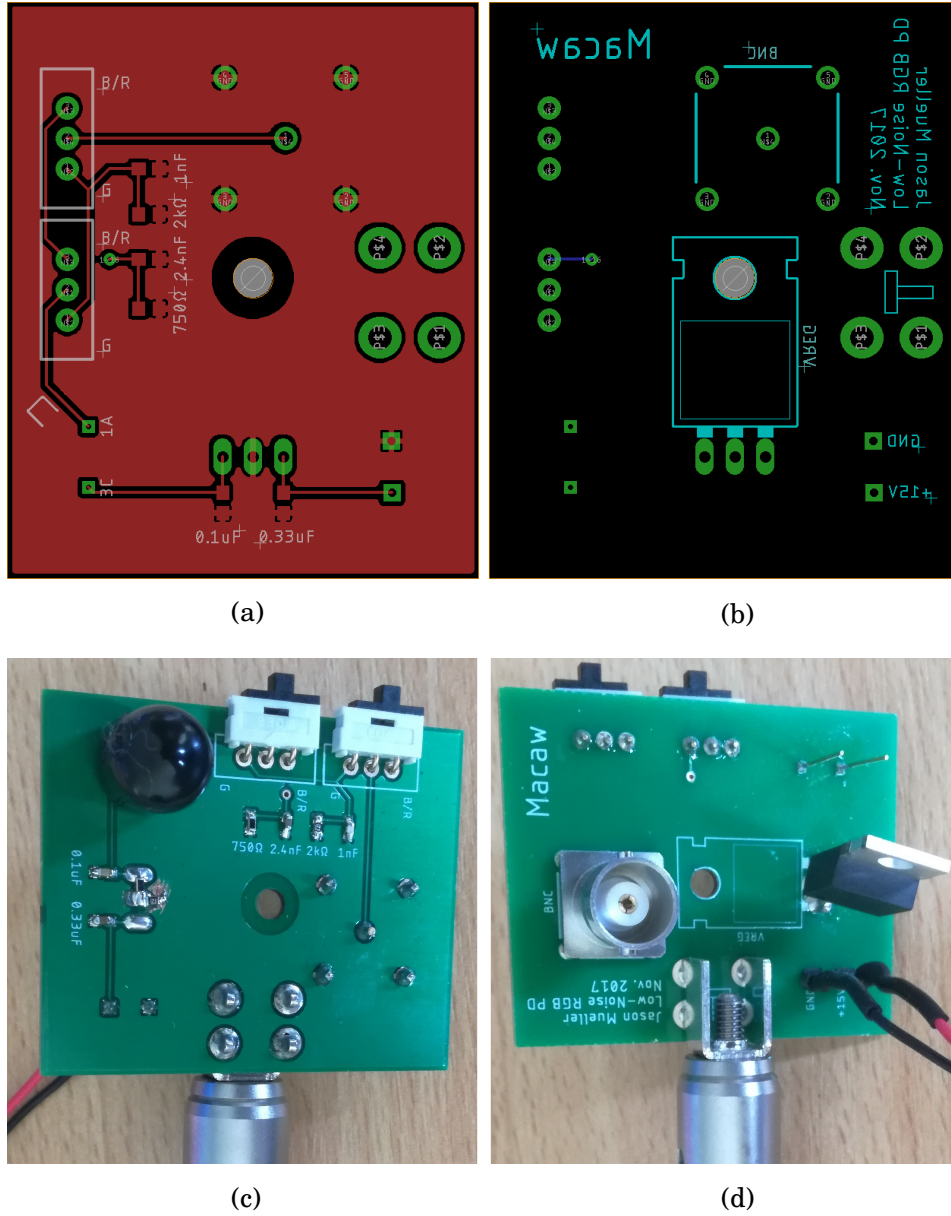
The PCB design and fabrication of a passive SiPD, dubbed *Macaw* after the vibrantly-colored red, green, and blue Scarlet Macaw. (a) represents the top PCB layer, and (b) the bottom (mirrored). (c) and (d) are fabricated PCBs with soldered components, mounted to a standard optical post mount. The dimensions of this PCB are $40 \times 49 \text{ mm}^2$.
